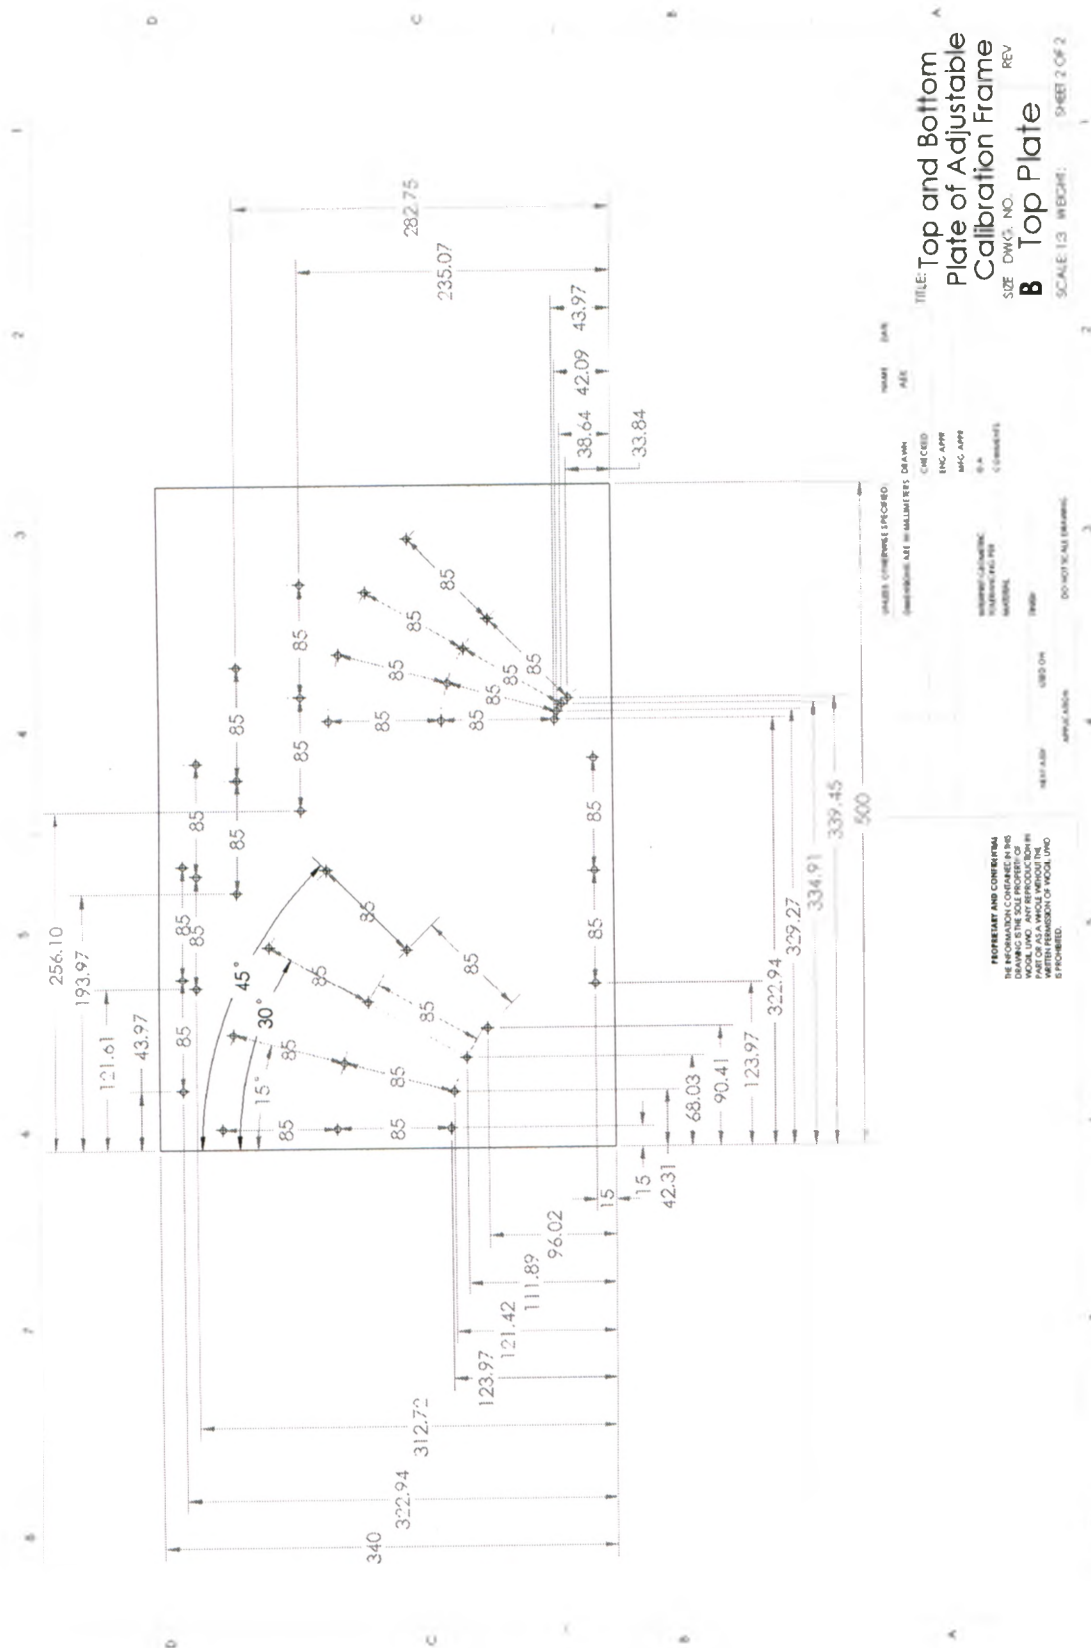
Dimensions of the top and bottom plate – adjustable frame
